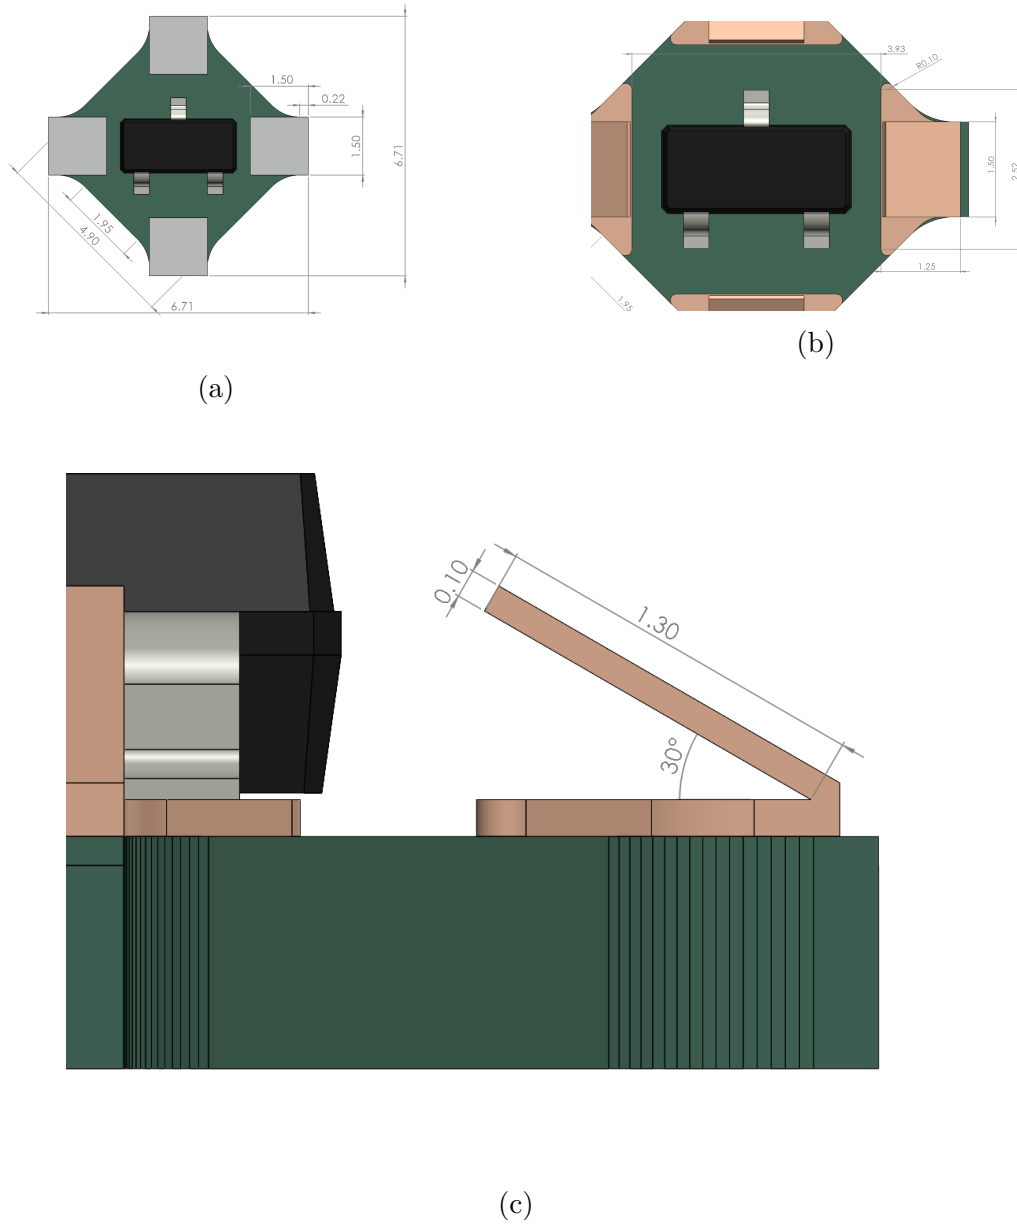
4BIc dimensions: bare 4BIc0 tile dimensions (a), 4BIc tile with contacts (b), side view of the contact geometry (c)
